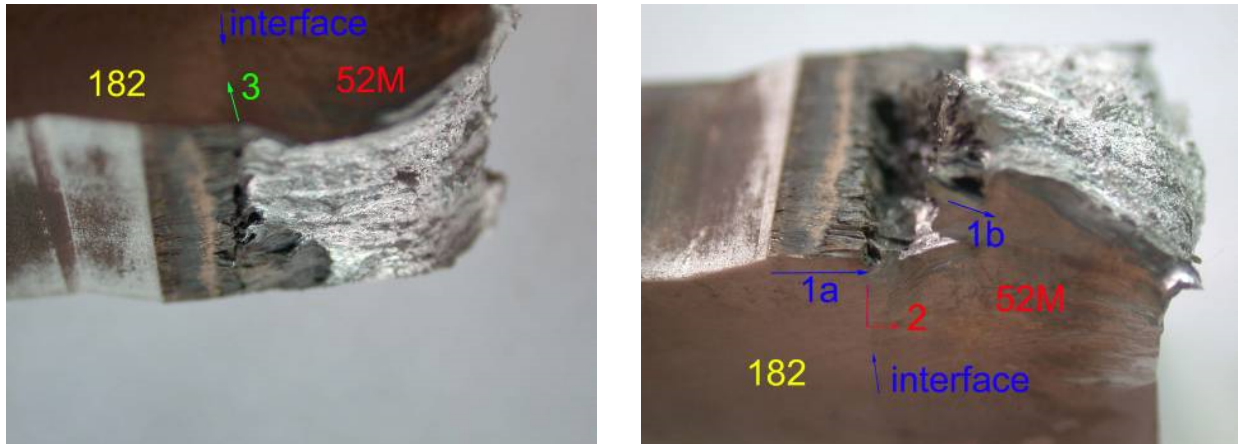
The two halves of fractured specimen A52M-182-TS-3.
